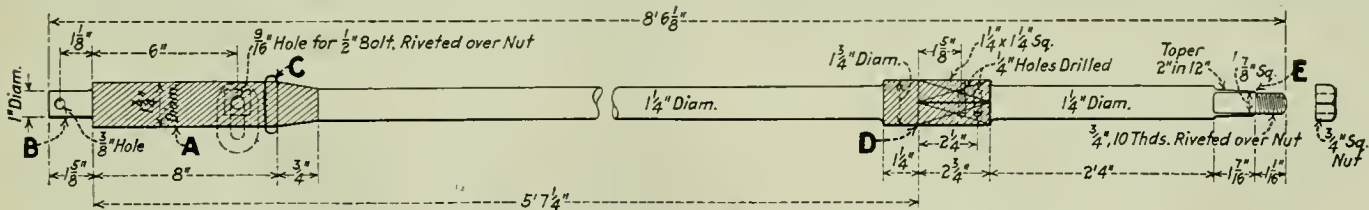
Details of Brake Shaft Made of a Single Piece of 1¼ in. Round Stock Without Weld
